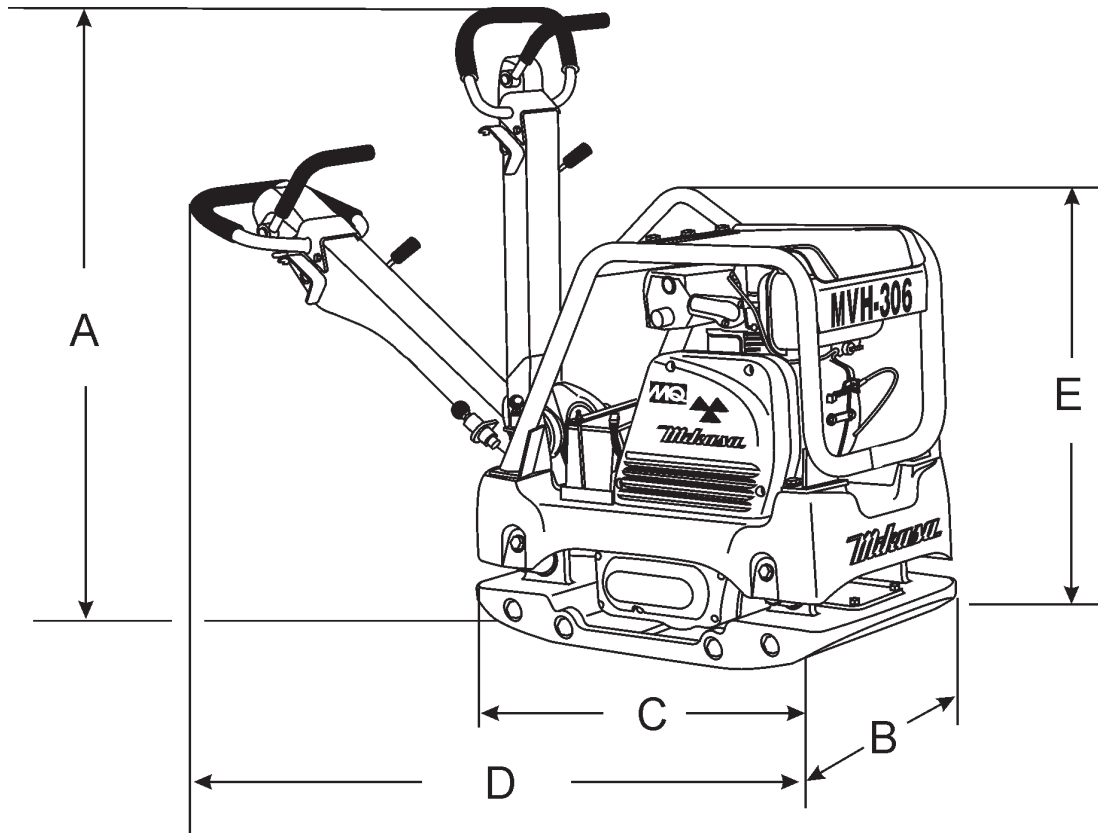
MVH-306DS2 Reversible Plate Compactor Dimensions
